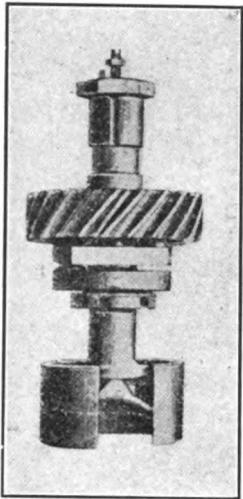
The C. I. D. rotary valve with its operating mechanism.
